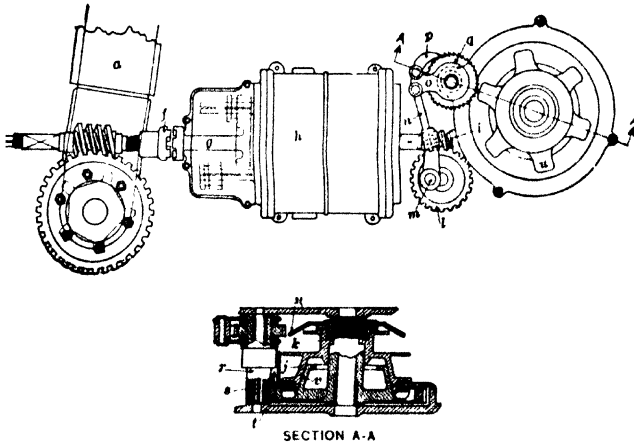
Diagram of Operating Mechanism, Jeffrey Coal Cutter, Type 24-A.
